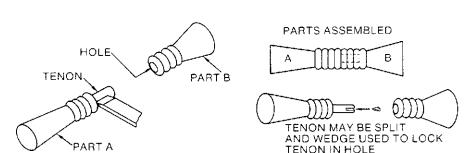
Extra-long lathe projects can be produced if you turn separate pieces and then connect them as shown here.
